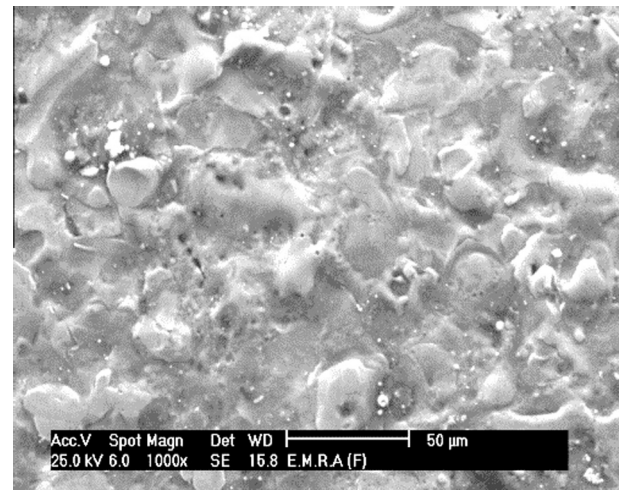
Surface cracks of DIN 1.2379 soft machining using POCO graphite EDMC-3 electrode.
